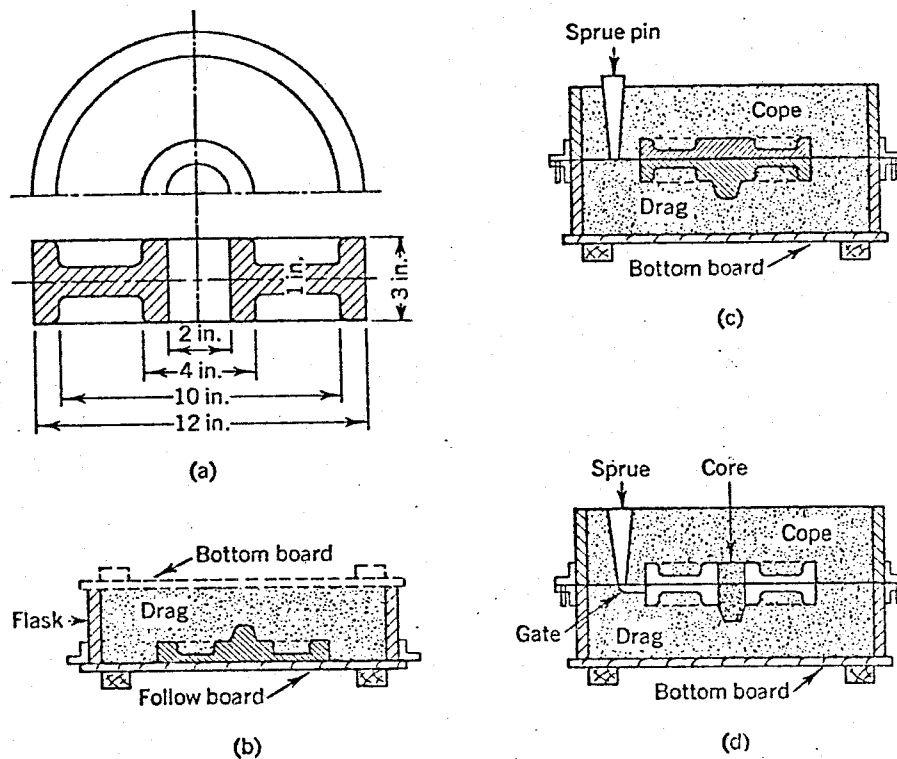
Typical green sand mold, (a) machined blank, (b) drag, (c) cope, (d) finished mold.
